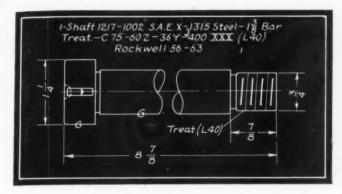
After carburizing and two reheats and oil quenches, one end is drawn in lead at 1400 degrees
